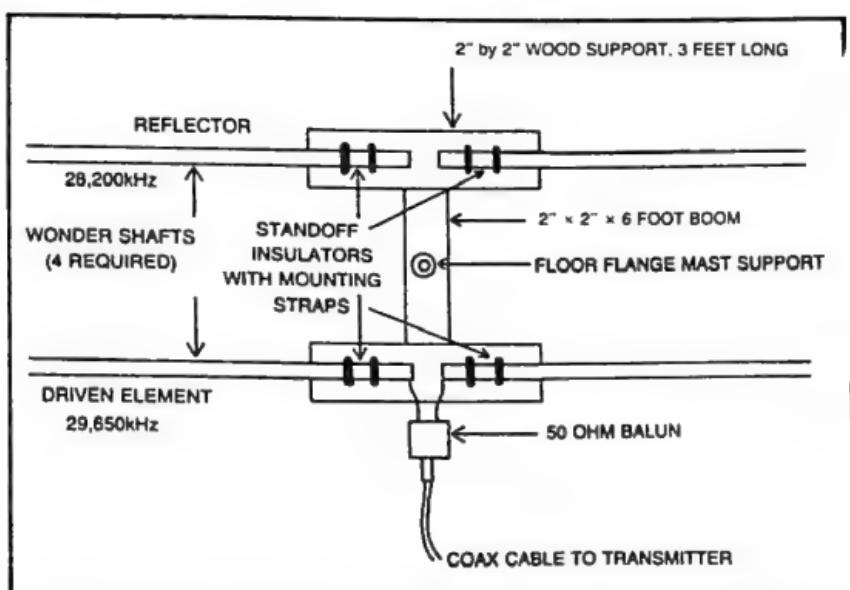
Mechanical details of a helical element minibeam for 10-meter FM use. The boom may be wood, or sections of shower rods.
